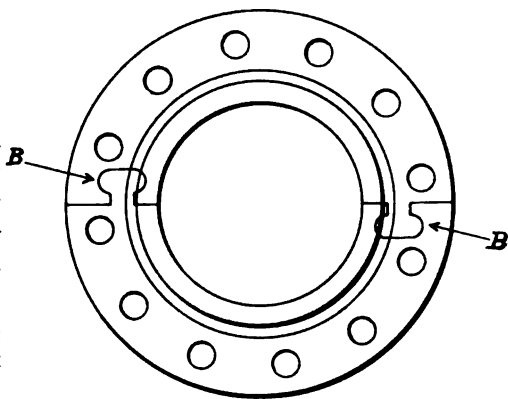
A DIVIDED FLANGE FOR A FLANGED-OUT JOINT
